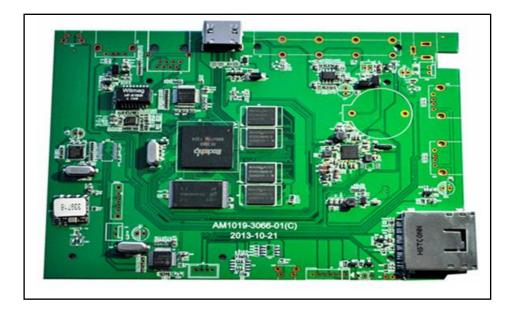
SMT assembly on PCB [454 x 341-Chinapcba.com] Source: (Bysco Technology (Shenzhen) Co. LTD, 2015)
